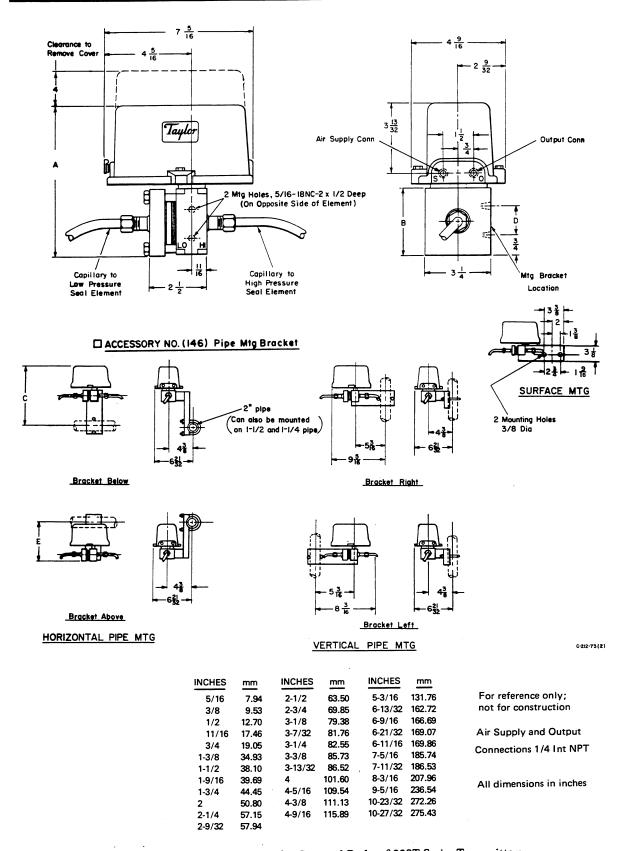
Mounting Dimensions for Case and Body of 320T Series Transmitters
